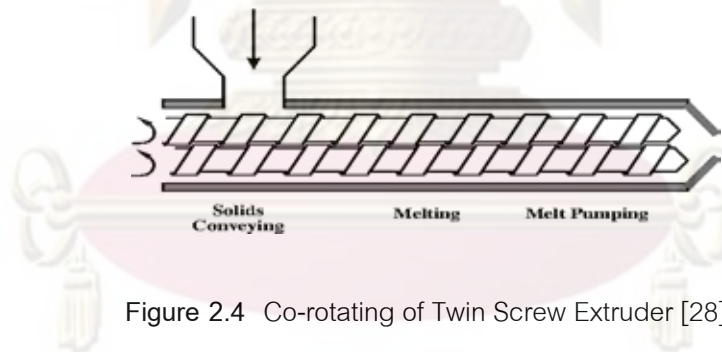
Co-rotating of Twin Screw Extruder [28]
